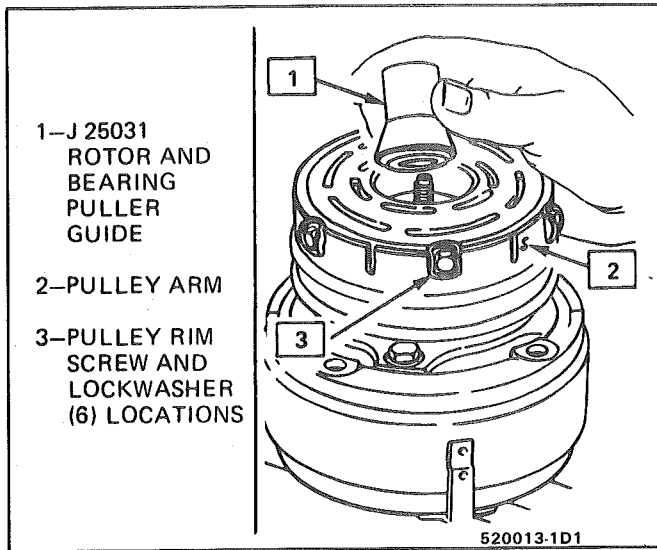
Removing Rotor & Bearing Asm. Retainer Ring
